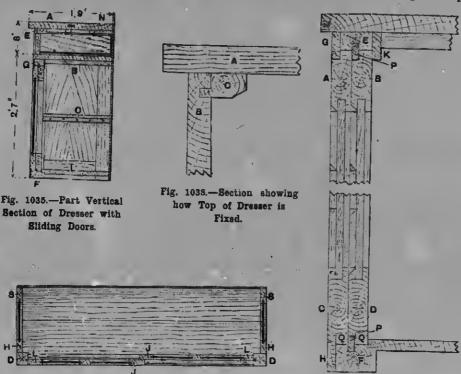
Horizontal Section through Dresser with Silding Doors.
